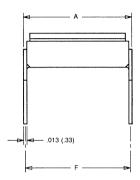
Ceramic DIP — Cavity Up (Facing Away From Printed Wiring Boards)
